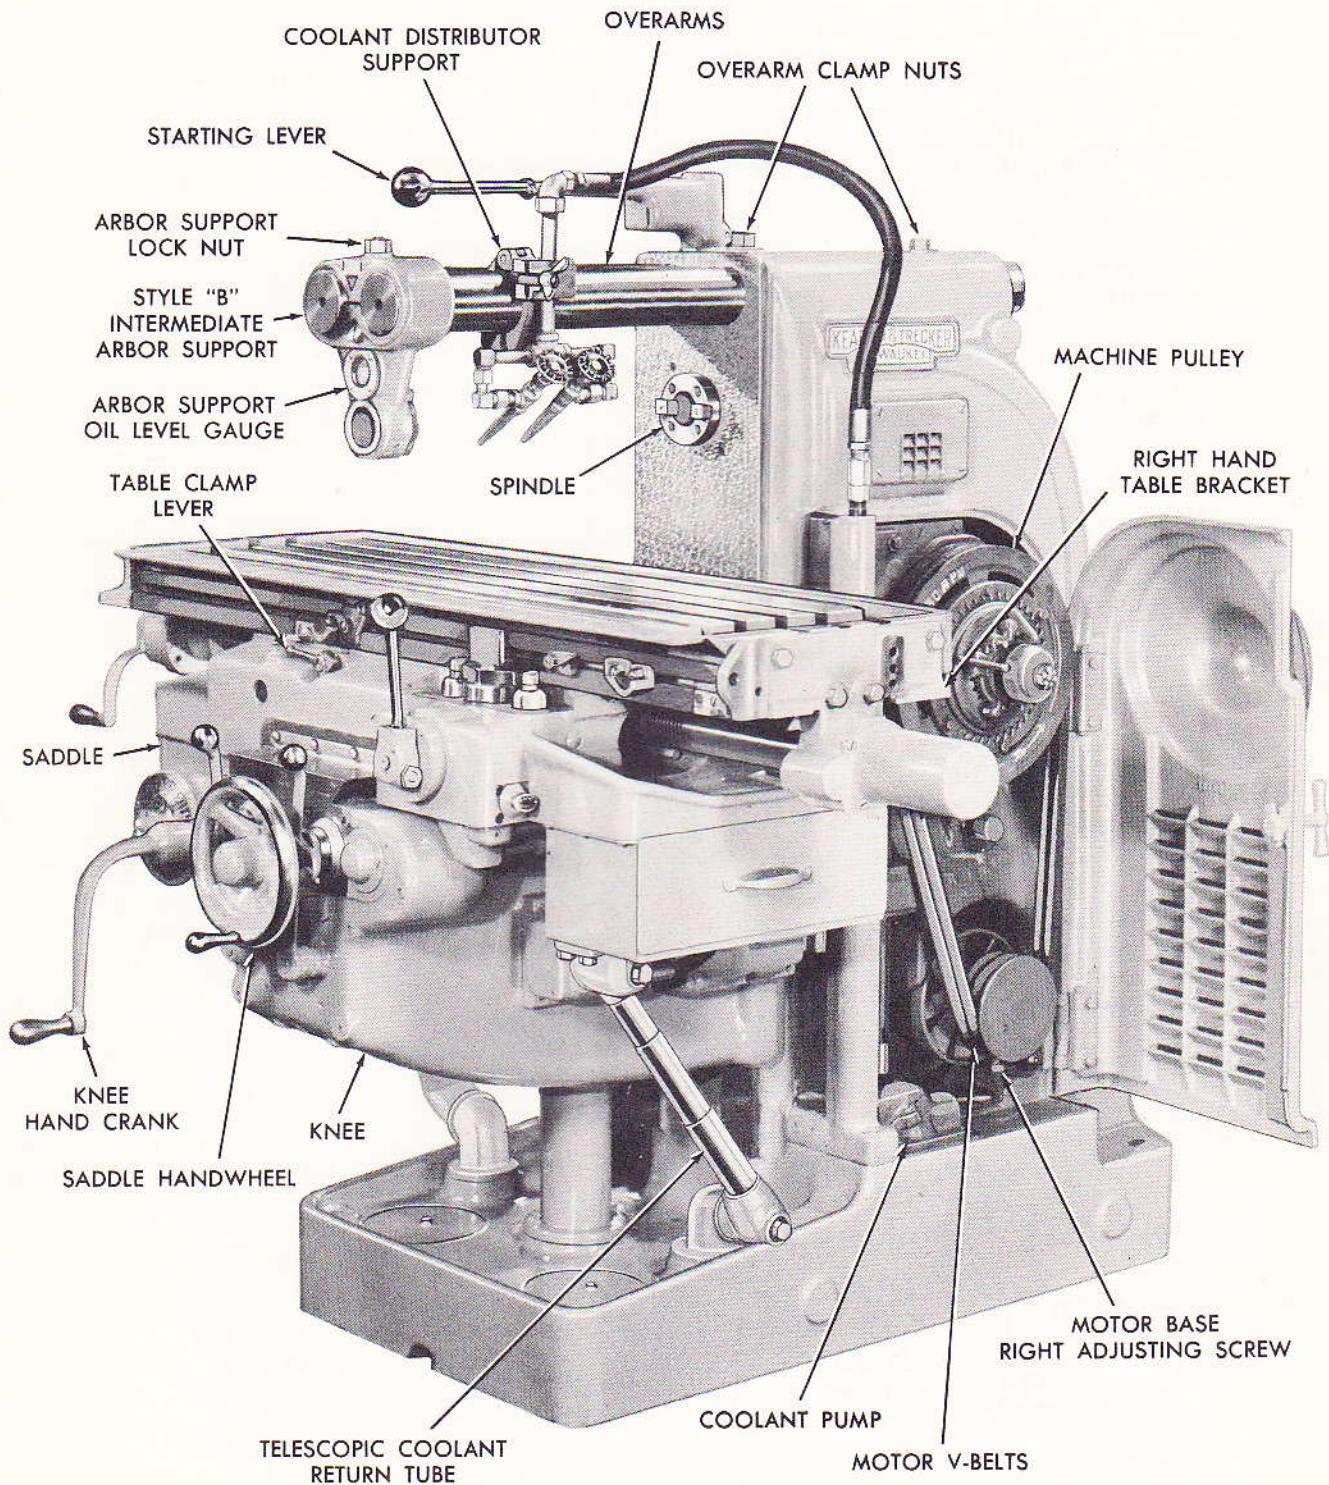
18"-24" AC Plain Machines—Right Front View
